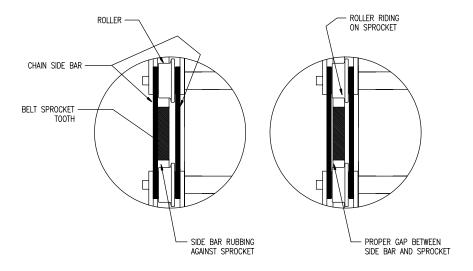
Top view of head or tail shaft at belt sprocket showing proper clearances between belt side bars and sprocket teeth.
